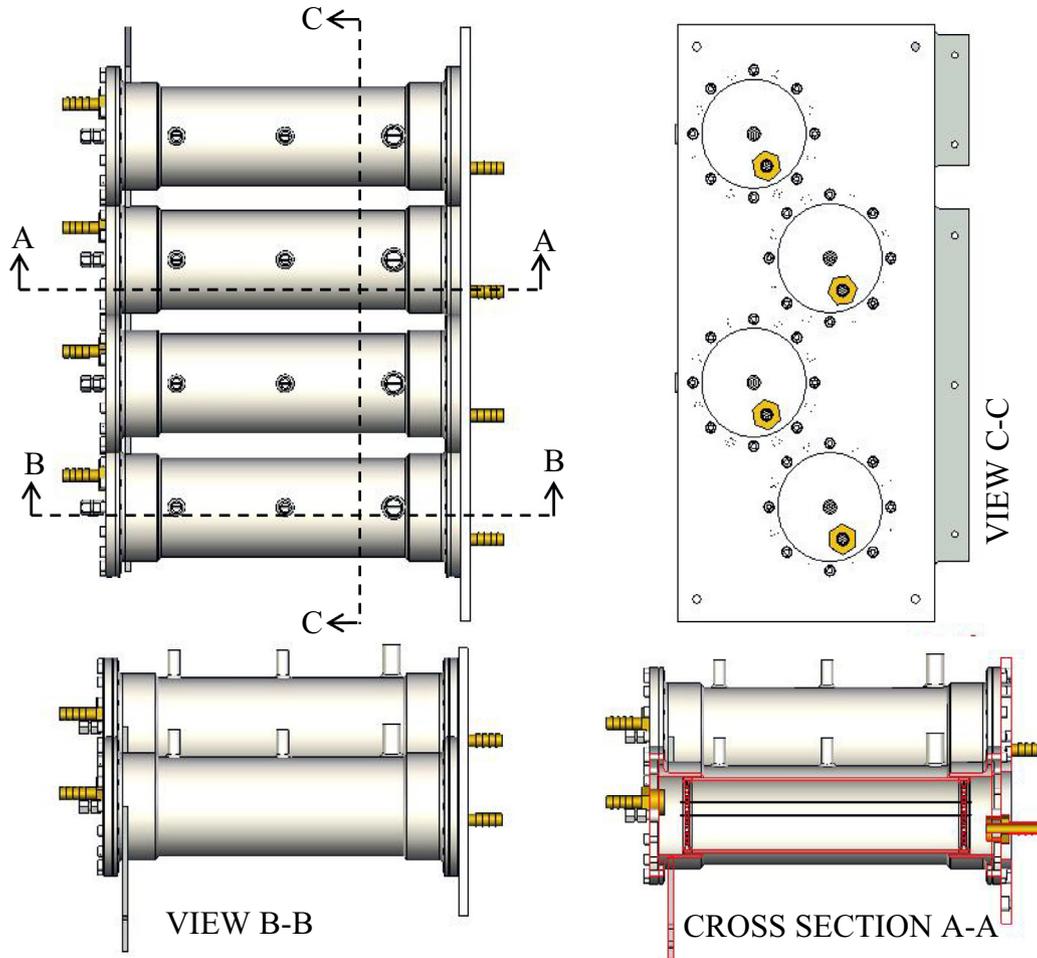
Snapshot of CAD drawings of the generators layout (thermal compressor).
